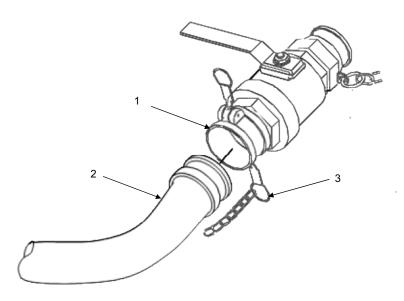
Drain Ball Valve Assembly with Drain Hose.
